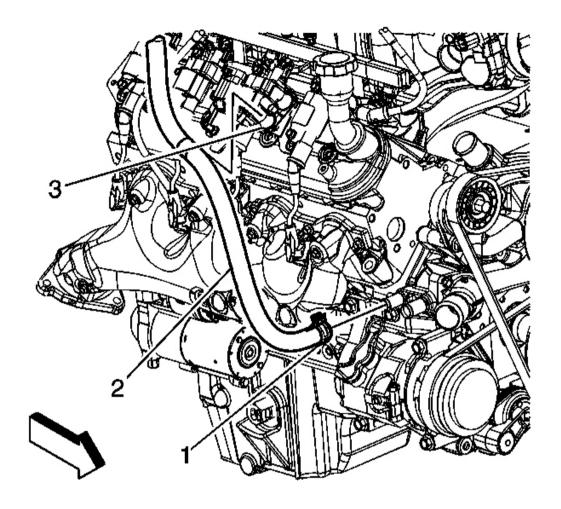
View Of Heater Inlet Hose, Clamp & Waterpump Courtesy of GENERAL MOTORS CORP.
